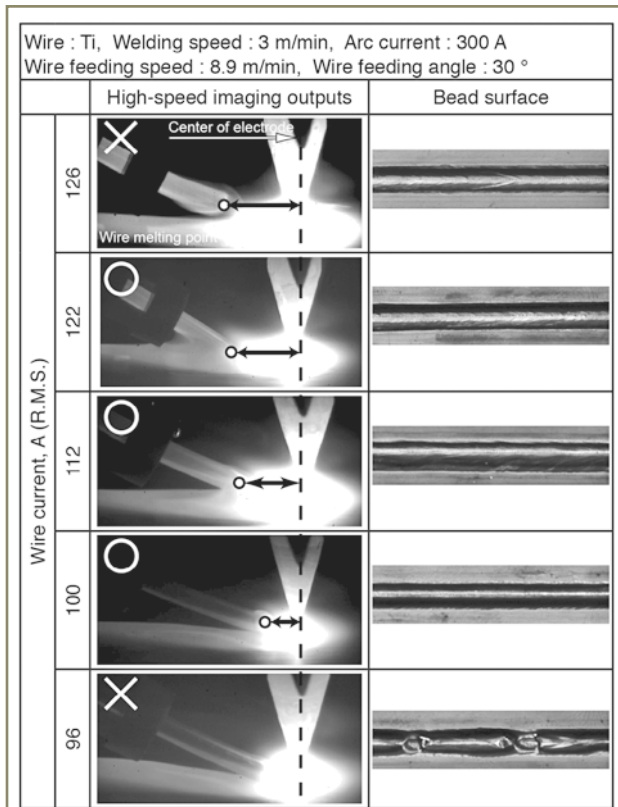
High-speed imaging outputs and bead surfaces (Ti)
